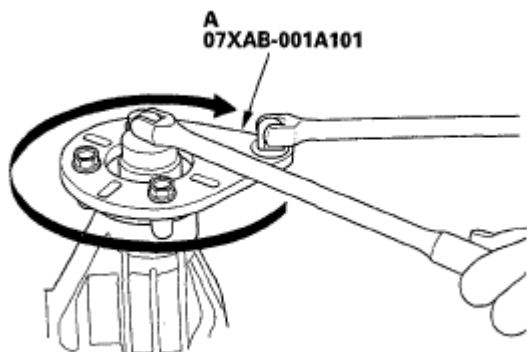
Identifying Companion Flange Holder On Companion Flange
